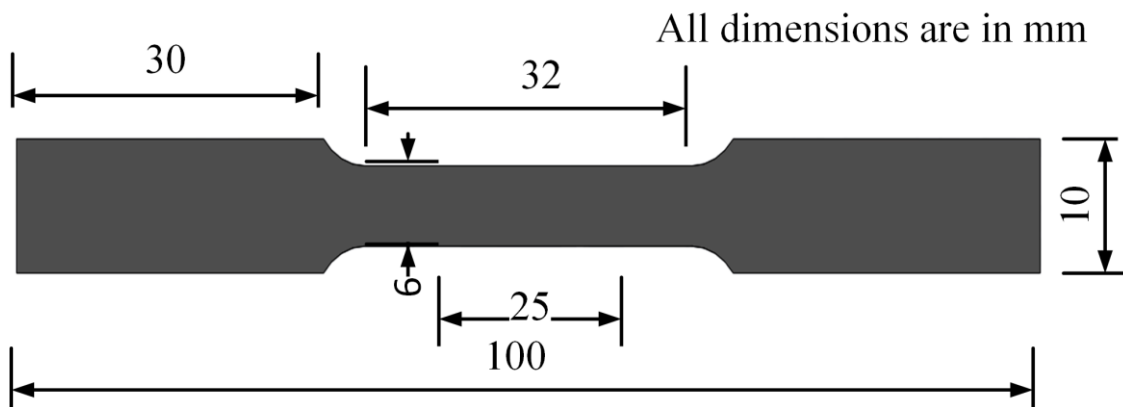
Dimension details of tensile specimen (ASTM E8)
